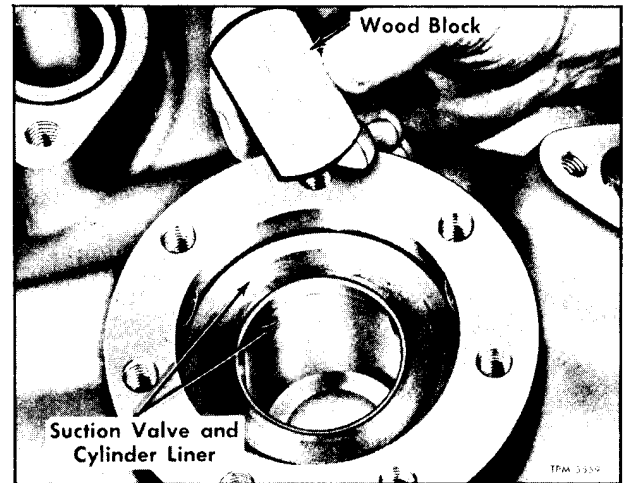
Wood Block Used for Removal of Suction Valve and Cylinder Liner
